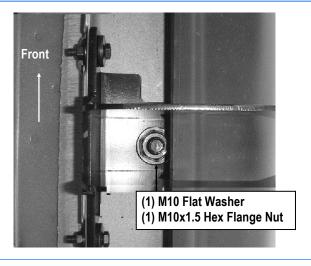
M10 Bolt Plate Installed (on Driver Side Front Mounting Location)
